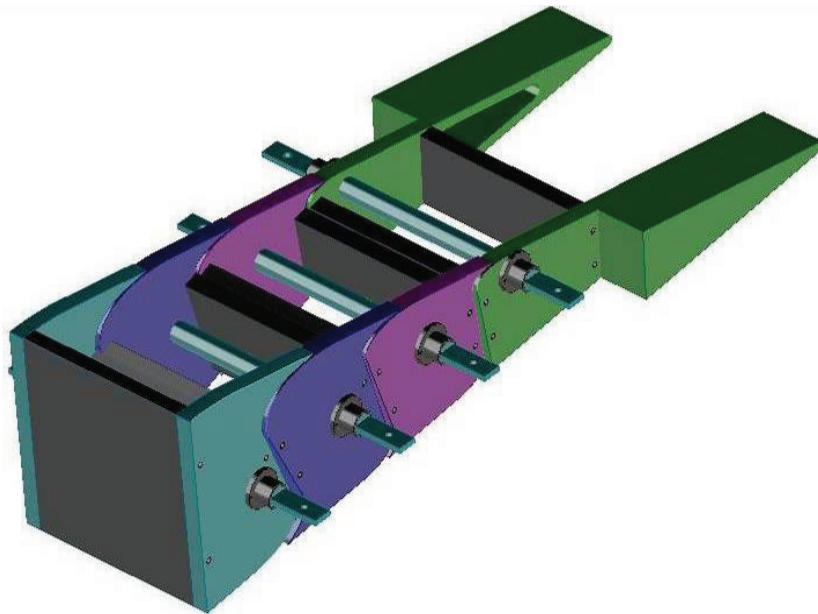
View of the three dimensional CAD models for the four solid boxes (surface panels are not shown).
